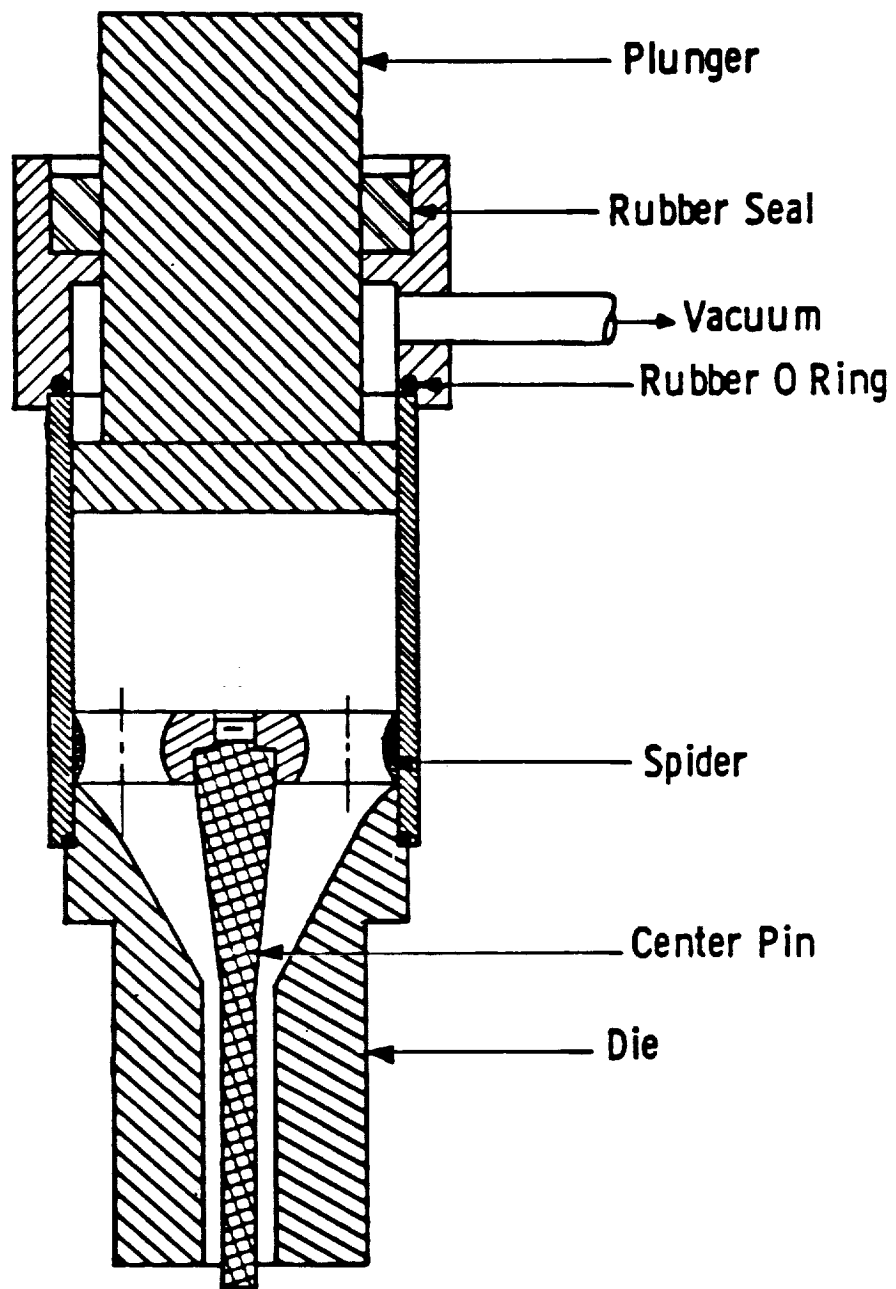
Schematic of Extruder Assembly for Extruding Porous Support Tubes
